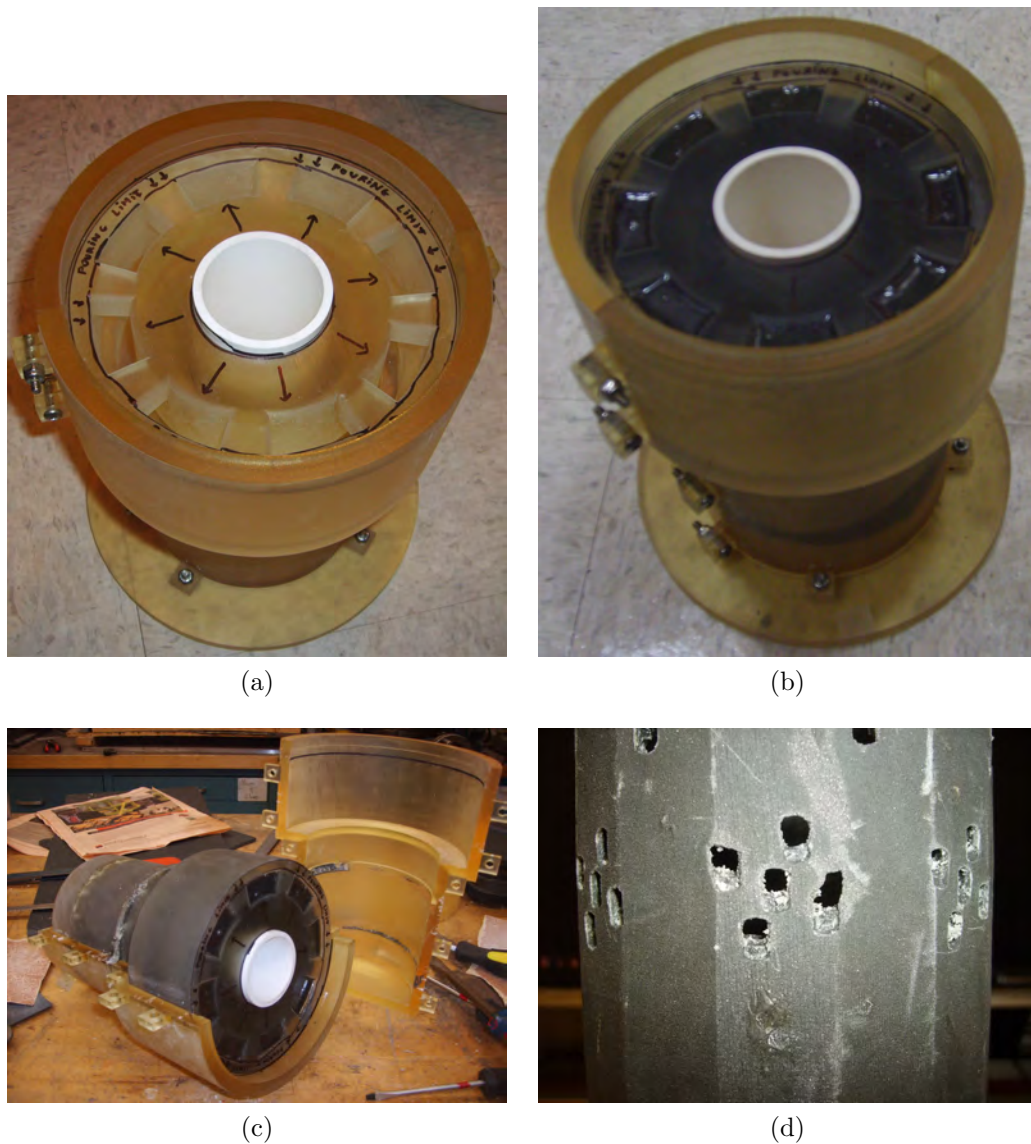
(a) A mold manufactured for the aperture before pouring the tungsten powder into it. (b) Mold after casting. (c) Opening of the mold. The hard outer plastic shell is apart while the soft plastic shell is still attached to the cast aperture. (d) Aperture after being released from its mold. The pinhole emplacements are larger than designed and show the limitations of the cold-casting technique.
